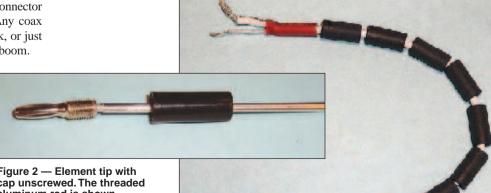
Element tip with cap unscrewed. The threaded aluminum rod is shown.
